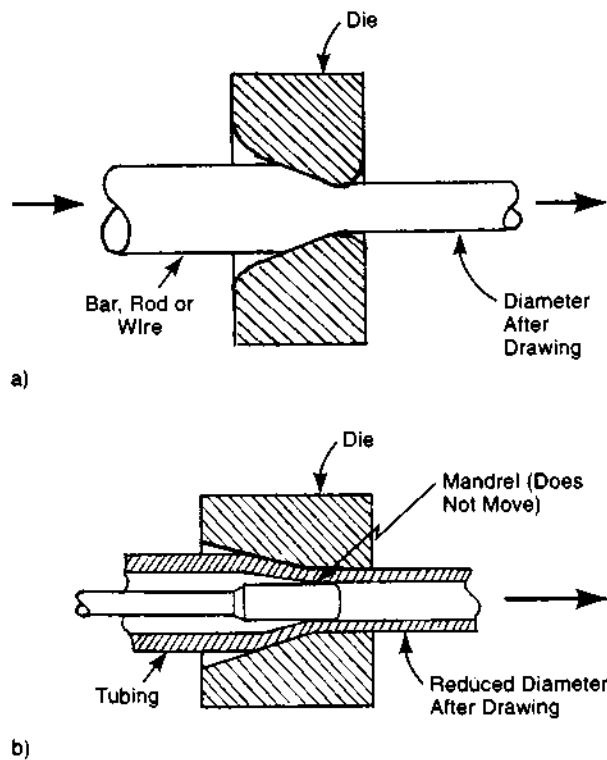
B2 Cold drawing. a) wire, b) tubing. The material is pulled through the die to reduce the diameter.
